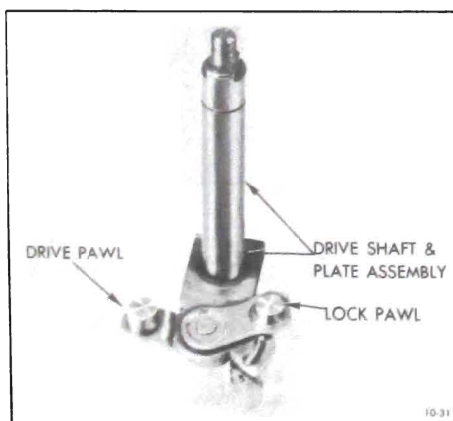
Assembling Lock Pawl over Drive Pawl
